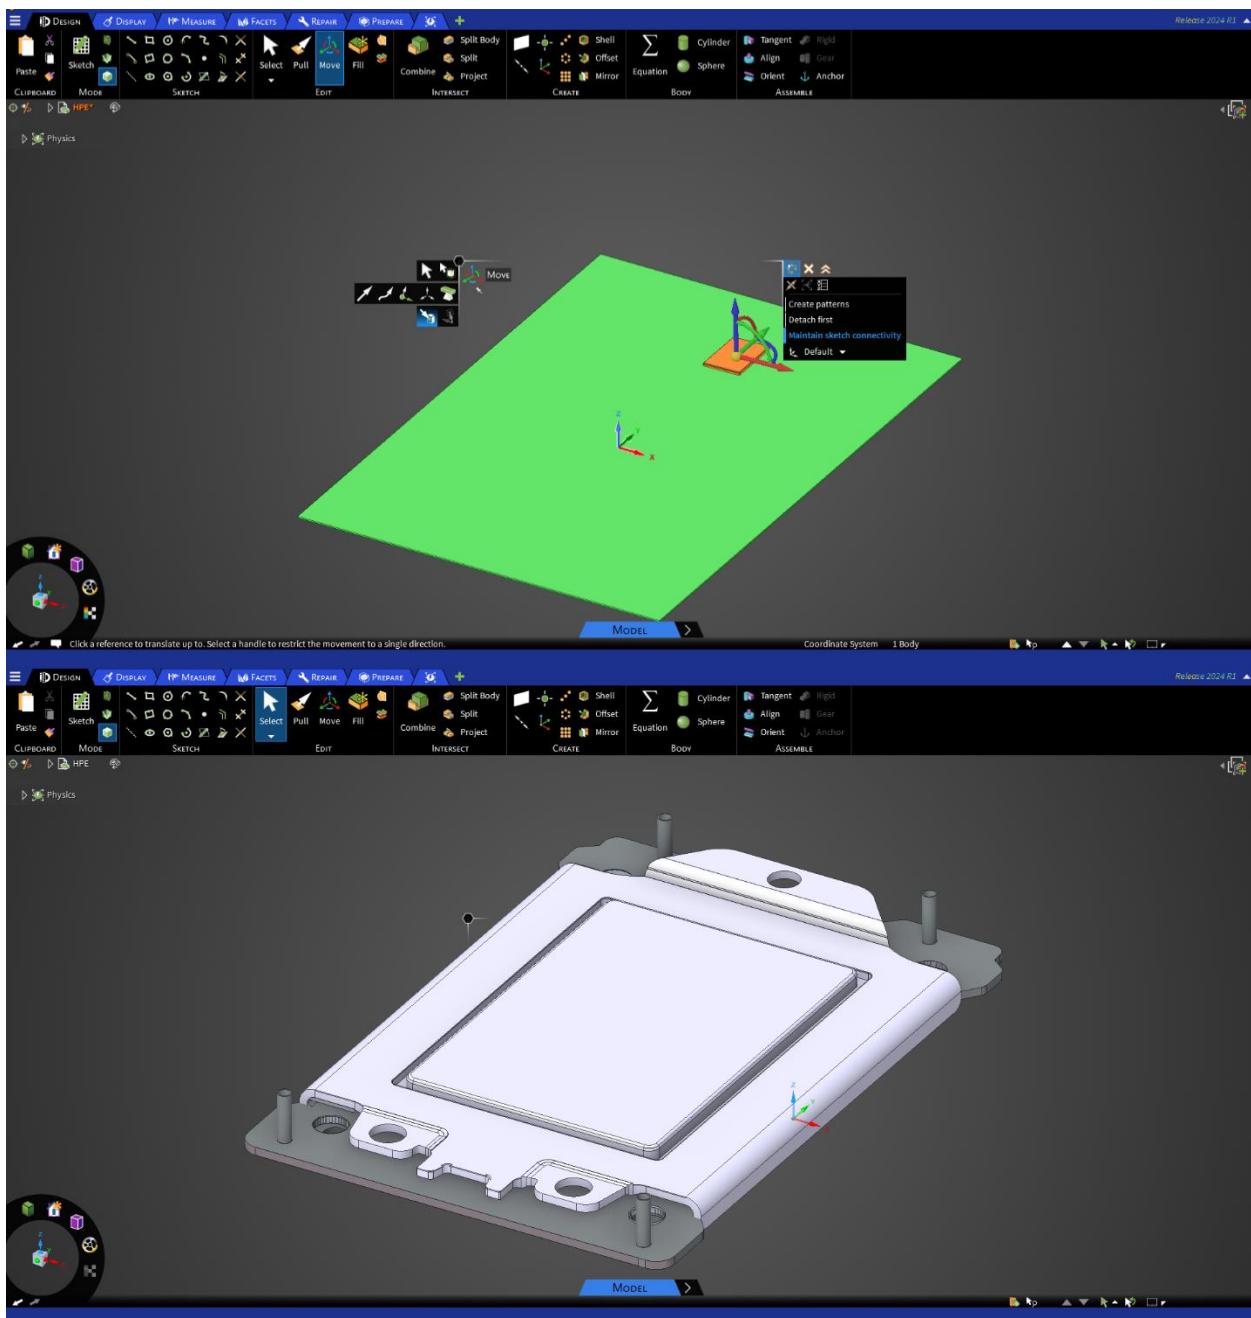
SP3 Socket Assembly - Component Integration and Motherboard Alignment
